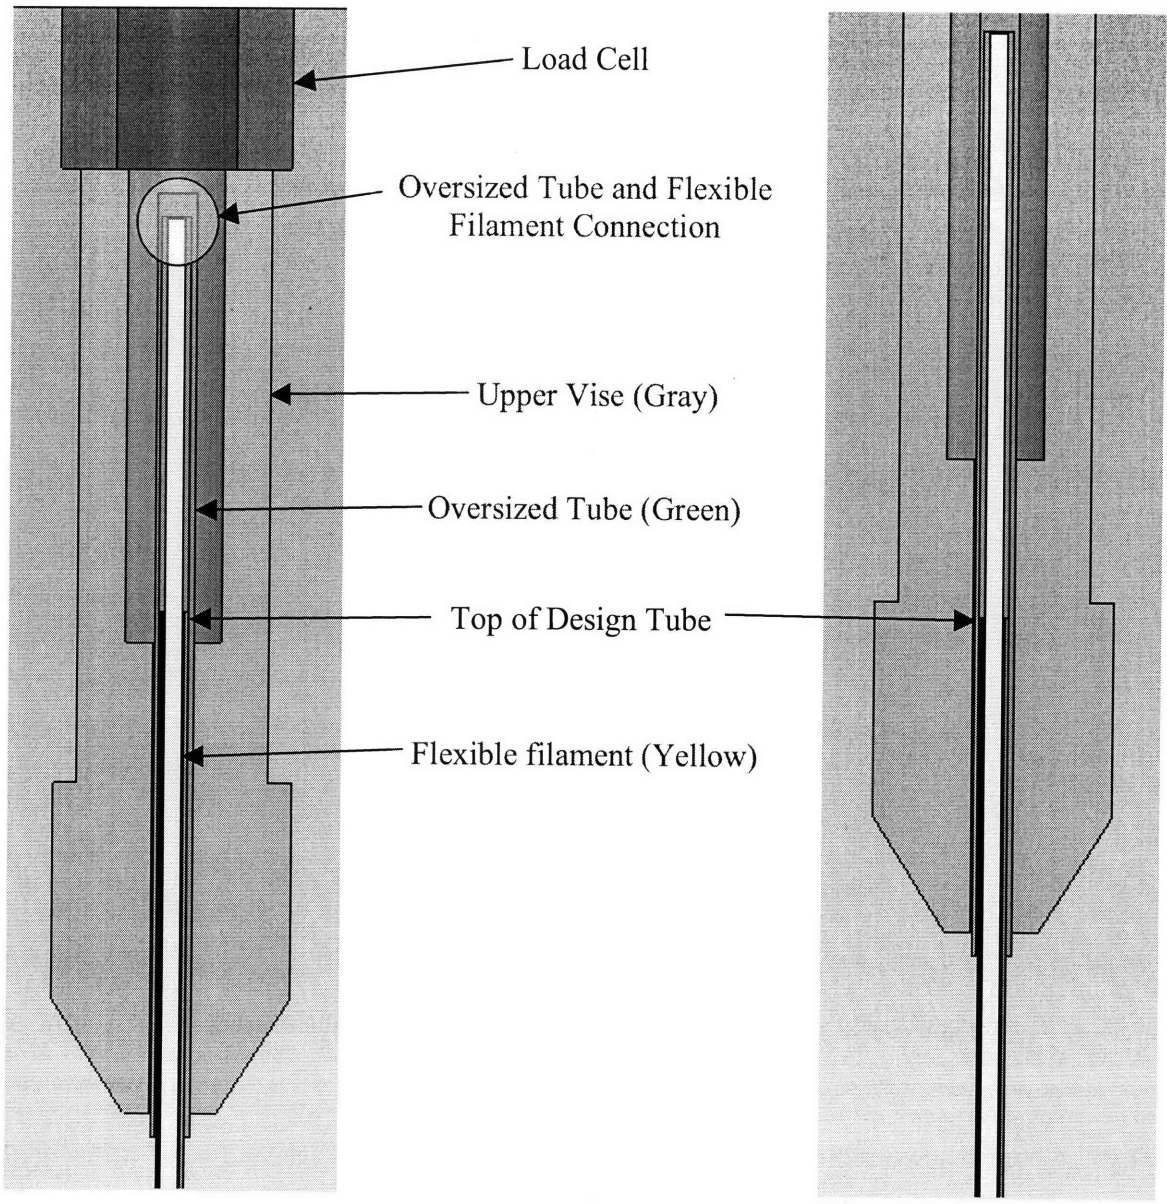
Cross-section view of assembly in low (left) and high (right) positions
